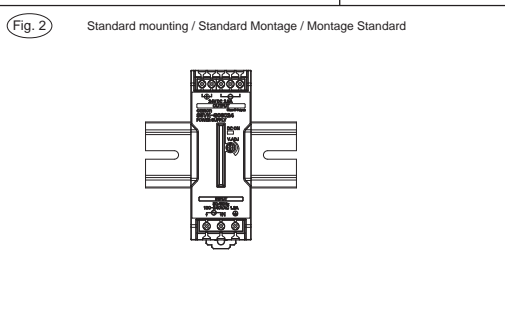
Standard mounting / Standard Montage / Montage Standard
